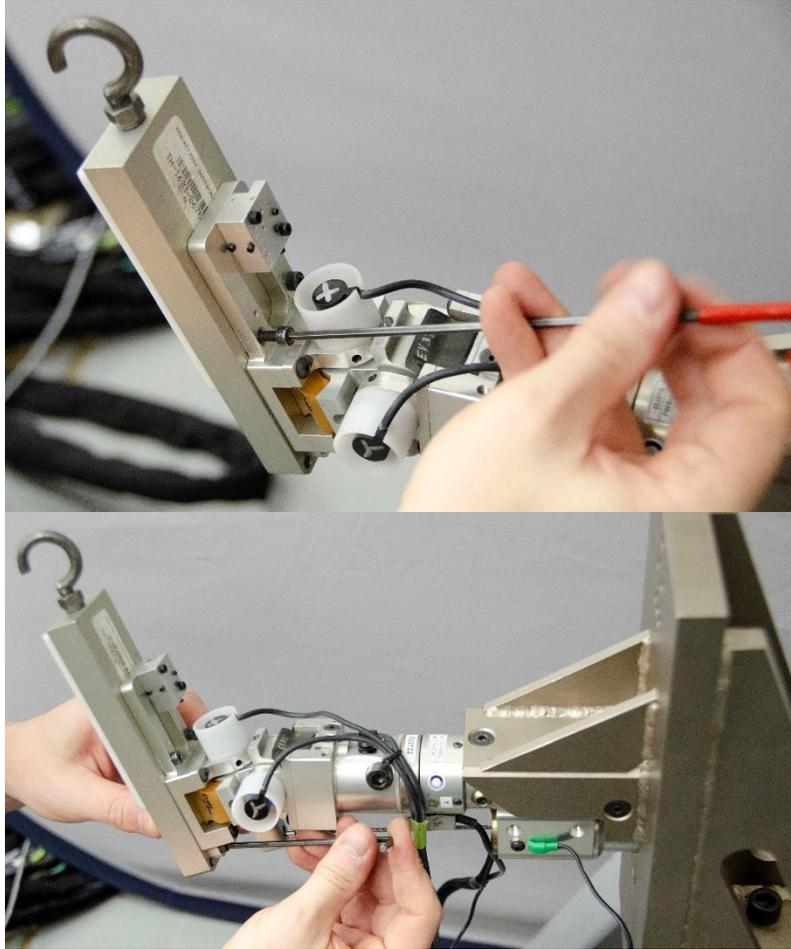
Attach inversion/eversion test bracket with hook to bottom of lower ankle plate
